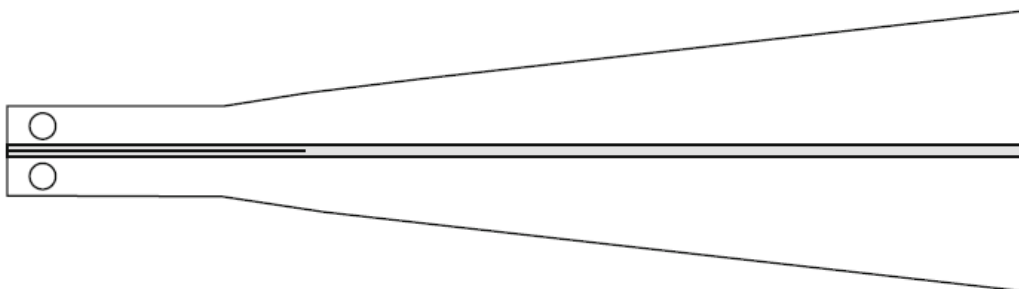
Mode I TDCB adhesive joint specimen [2].
